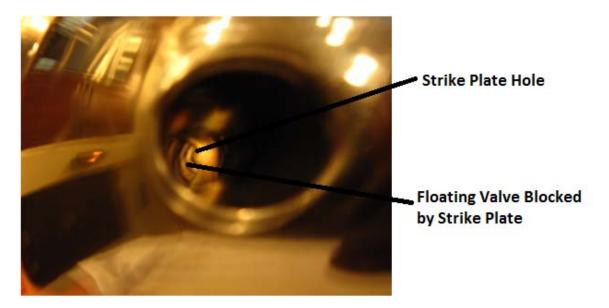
View Through Top of Lid of Strike Plate and Blocked Floating Valve
